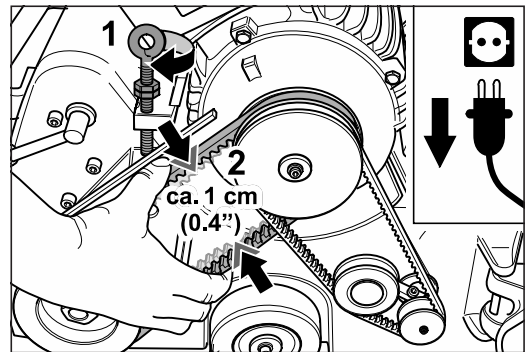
Tension the drive belt using the tensioning bolt at the motor (1).
